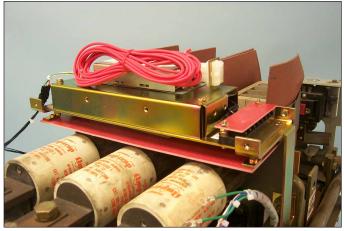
Aux. CT Module Assembly Mounted to the Aux. CT Module Mounting Brackets.
